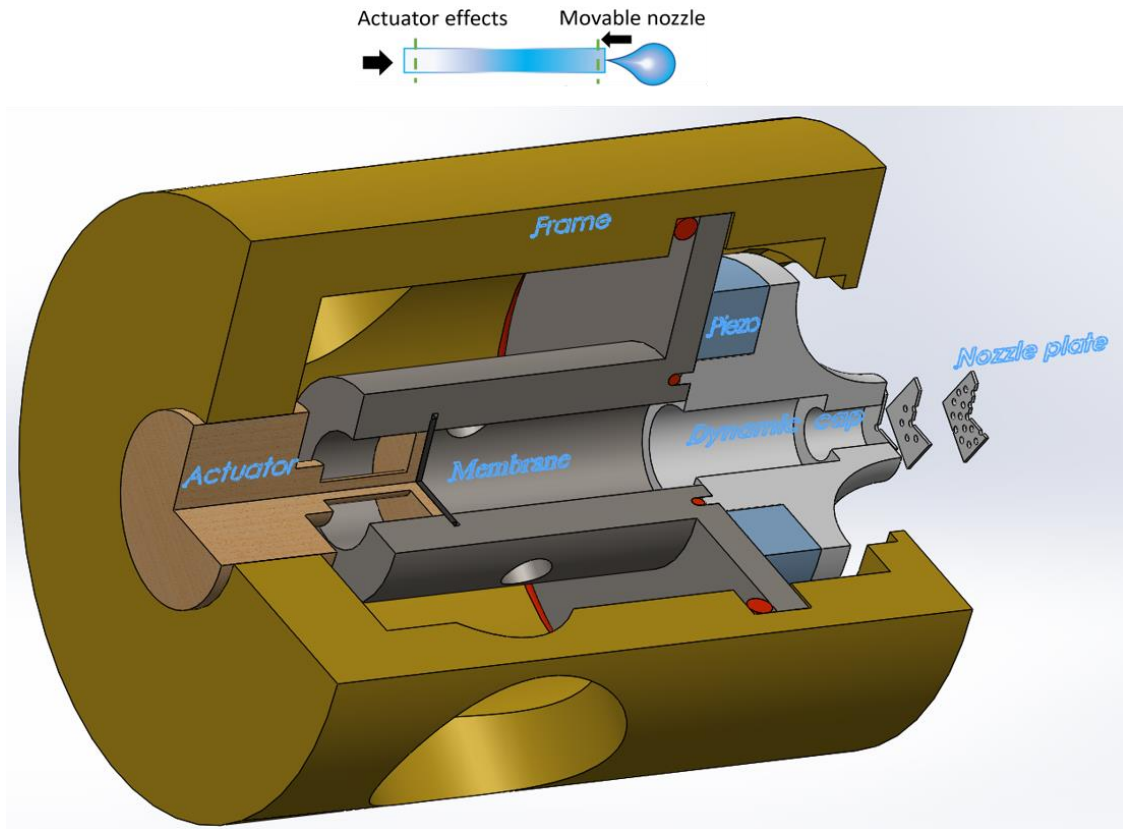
The initial CAD model of the new atomizer print head to be tested with using CFD simulations.
